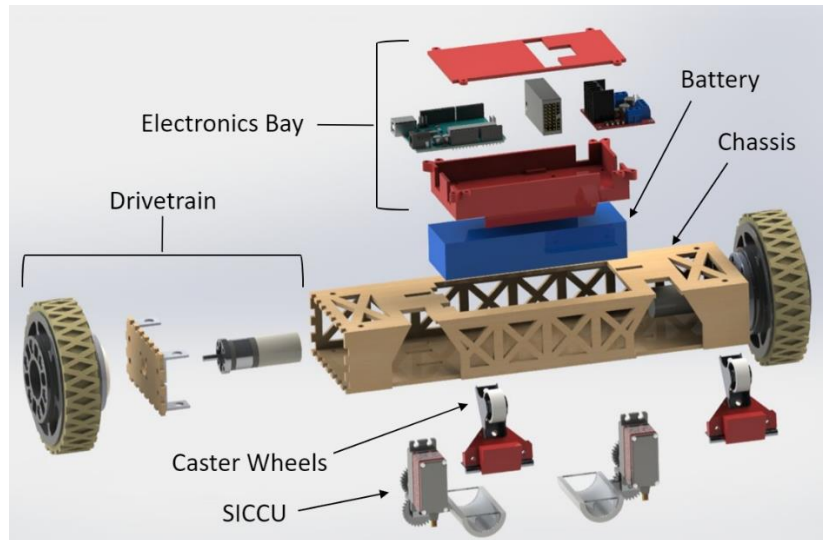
BURRITO Exploded View with Labelled Subsystems
